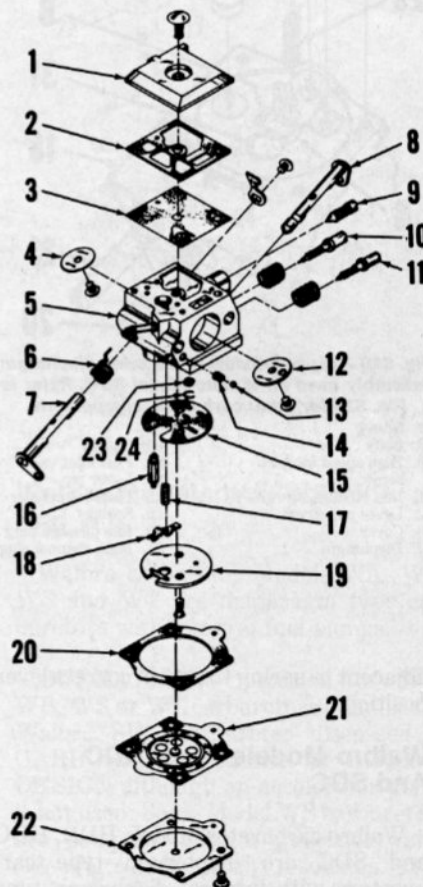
Exploded view of Walbro Model HDB and HDC carburetors.
